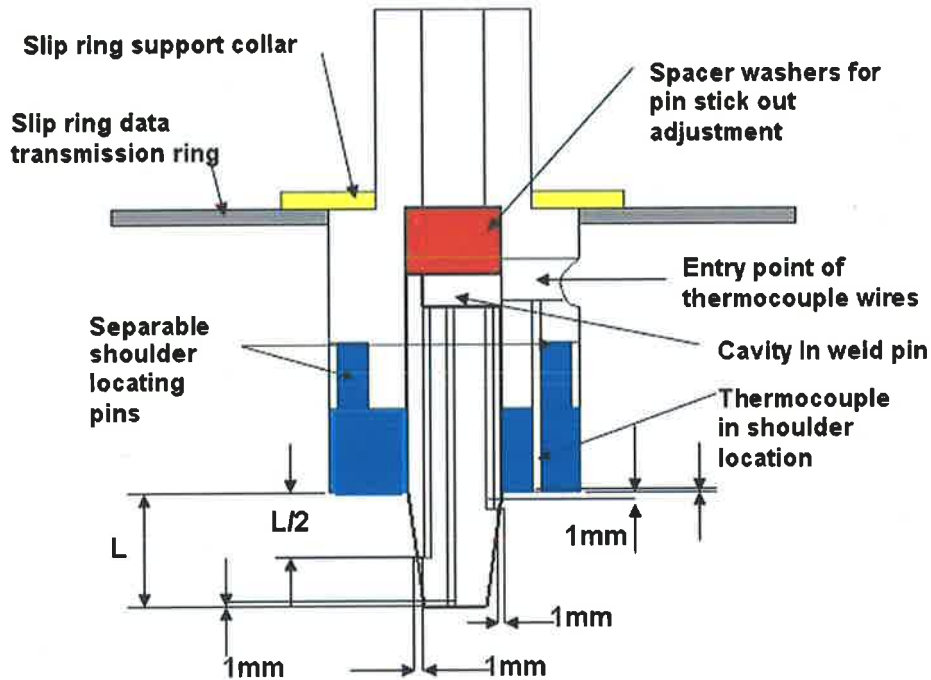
Schematic of Type 2 FSW tool showing location of thermocouple sites. A technical drawing of the tool can be found in Appendix A.
